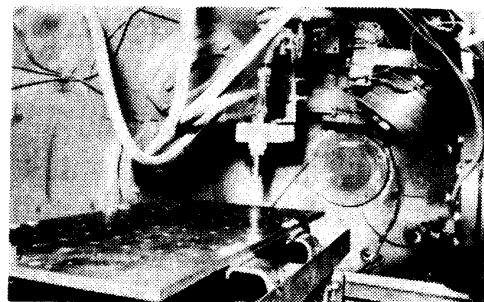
Inside view of high pressure chamber for welding experiment
